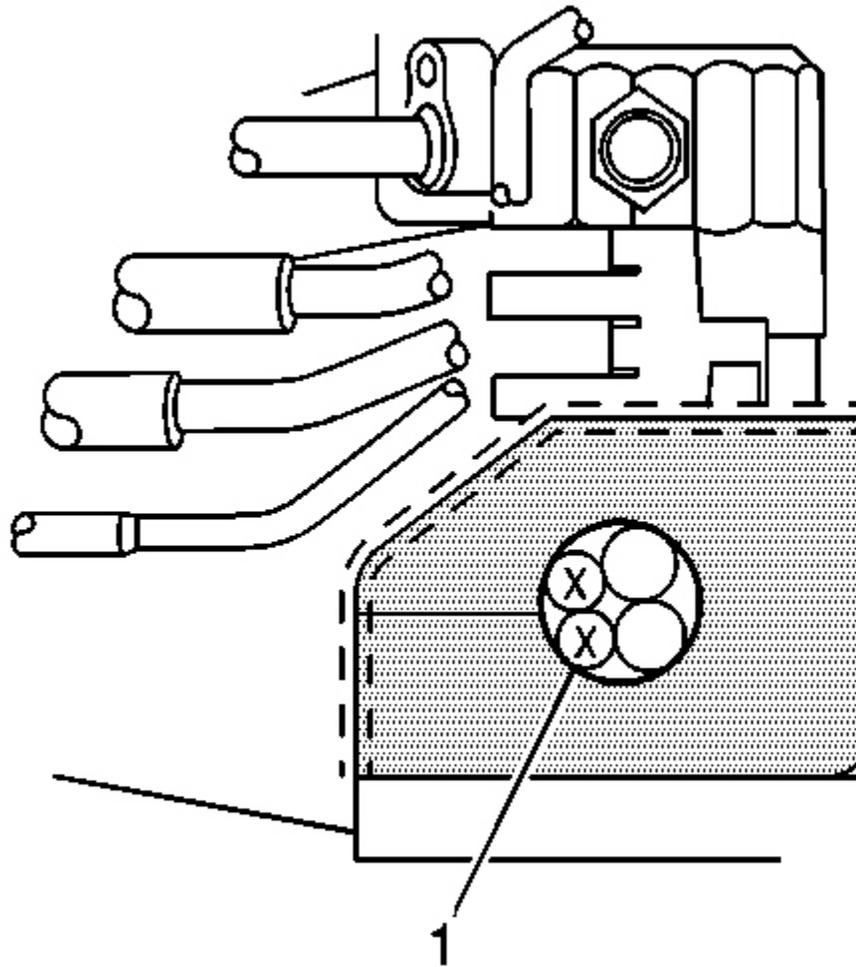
Locating Battery Cables In Engine Wiring Harness Insulator
